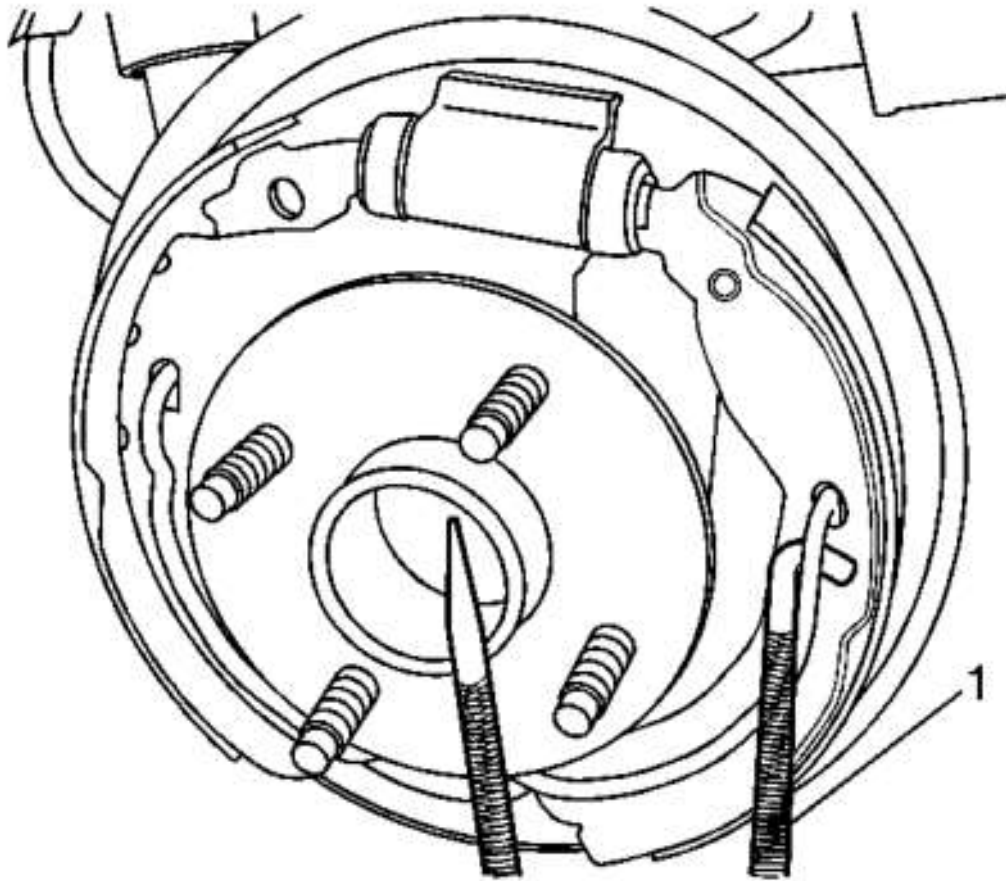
Pulling Universal Spring End Out Of Shoe Web Hole
